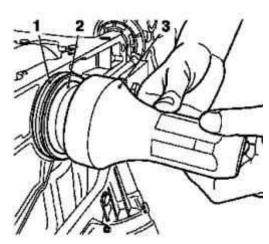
Mounting the rear flange of the crankshaft: 1 - gasket, 2 - a special device, 3 - a special device for pressing
